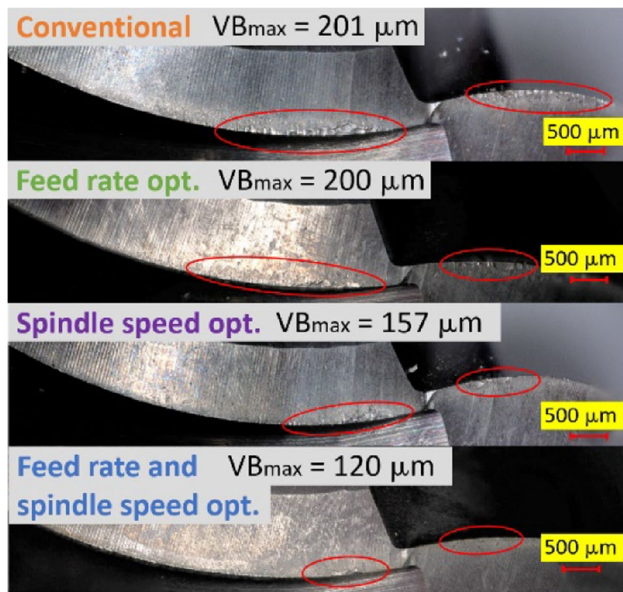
Comparison of cutting edges of three machining options (after 8 machined layers)
